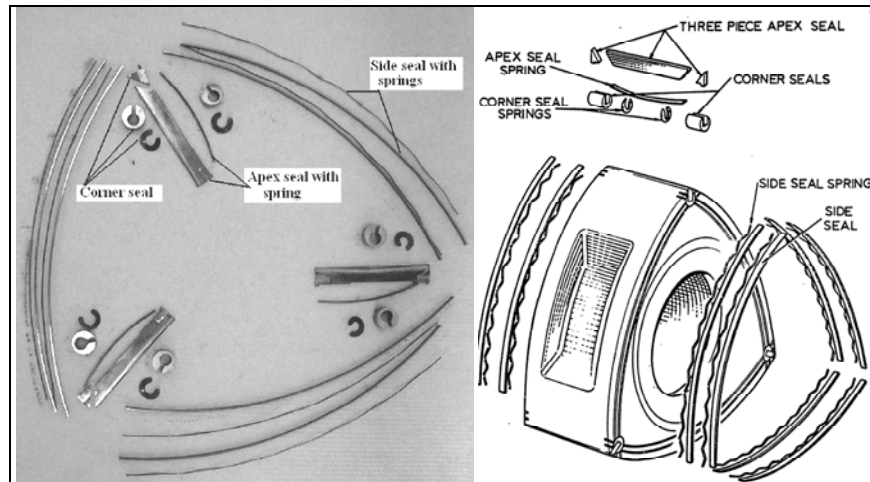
Gas sealing with springs (left) (20) and exploded view of typical engine gas seals (right) (22).
